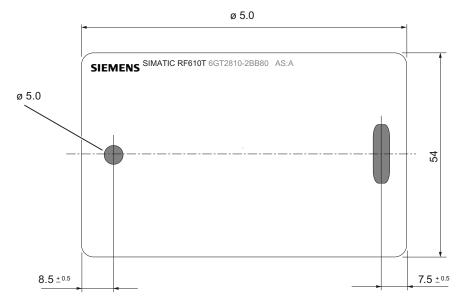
Dimensional drawing of SIMATIC RF610T
